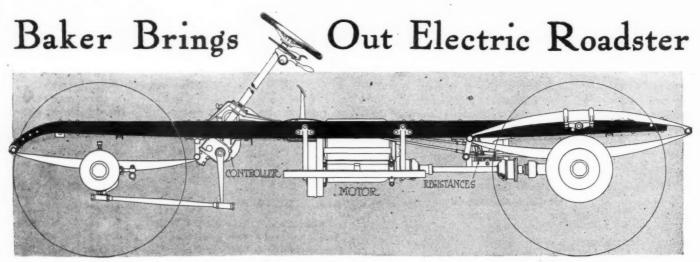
Side view of the Baker chassis showing disposition of the power and control units and special rear suspension
